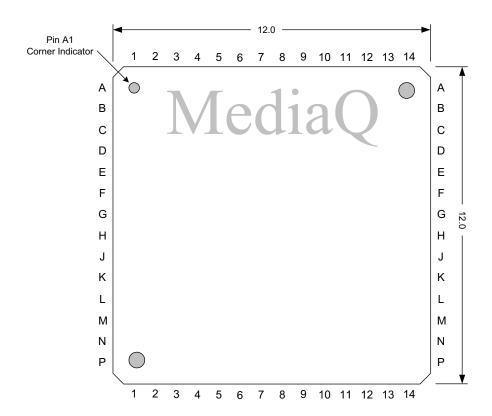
MQ-1132 BGA Package Top View with Dimensions in Millimeters
